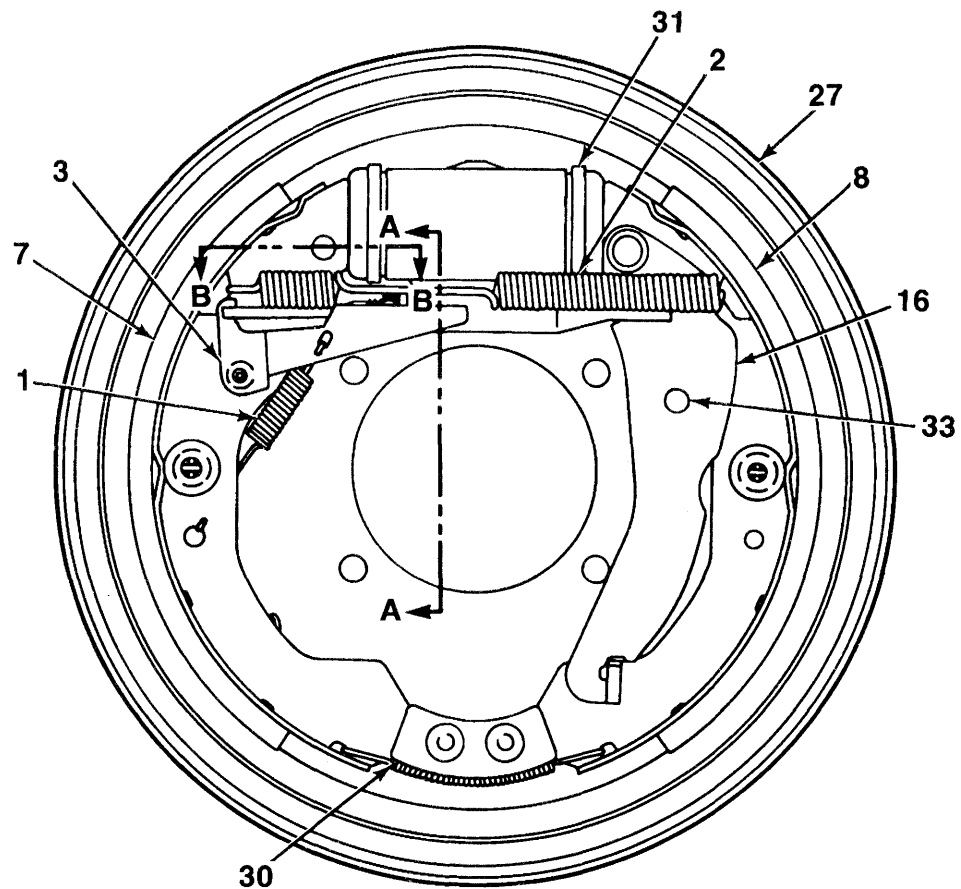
Adjusting Screw Assembly (Leading/Trailing)
